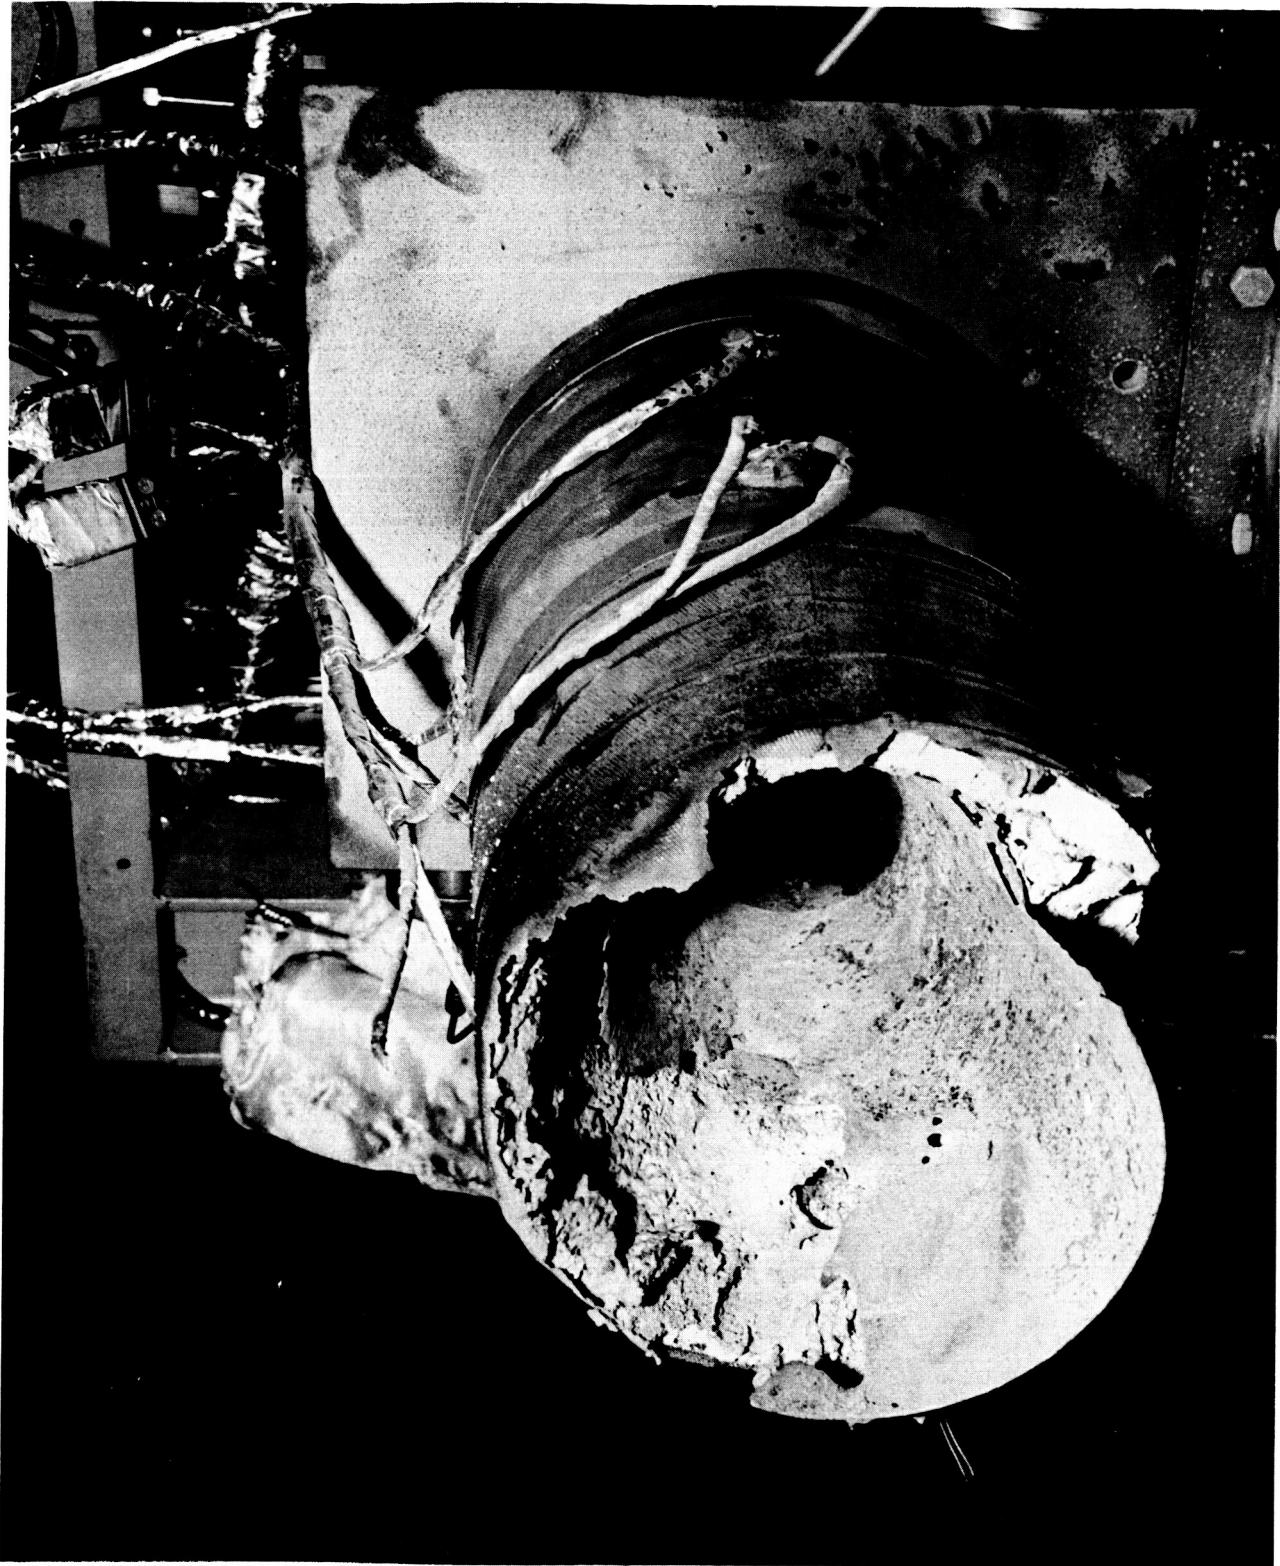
Engine Assembly S/N 2 After Fire Test
